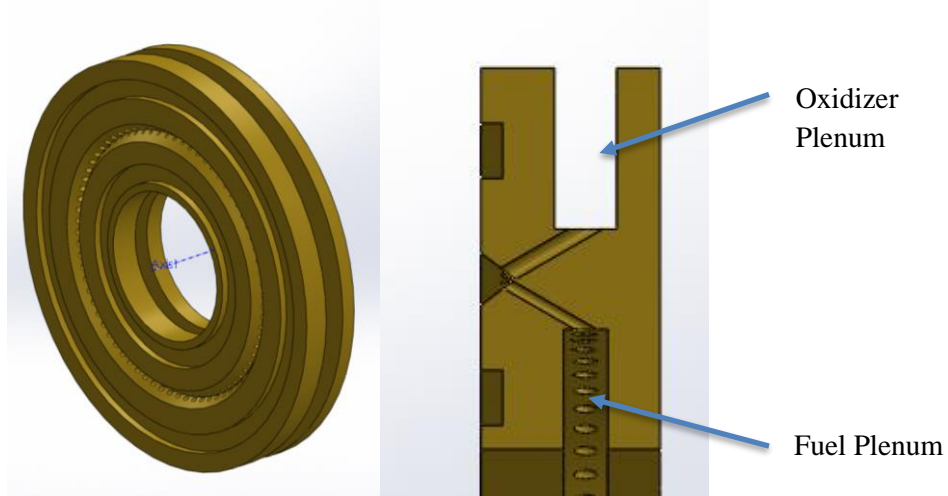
CAD Model of Nook Injector, (a) full isometric view, (b) magnified section view.
